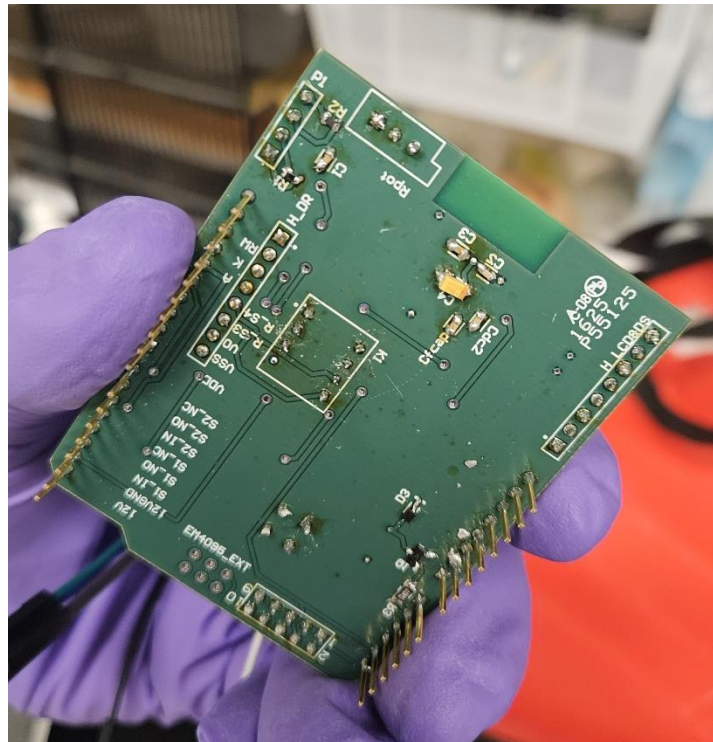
(Bottom view) Fabricated PCB shield with SMD components soldered on
